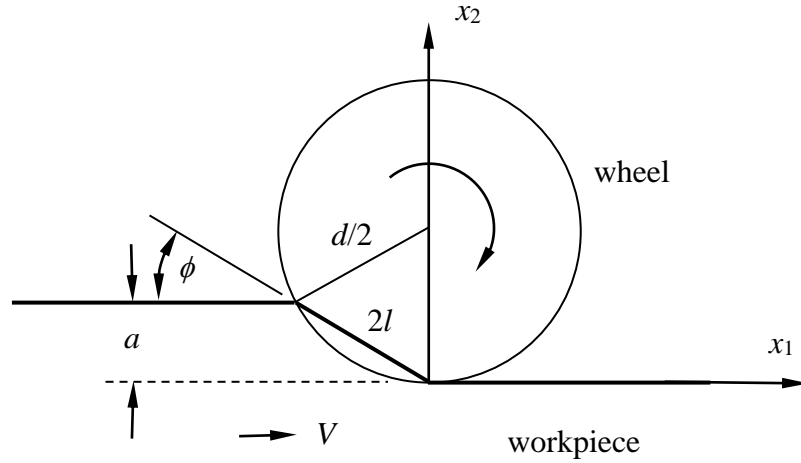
Geometry of the wheel, workpiece and slant shear plane.
